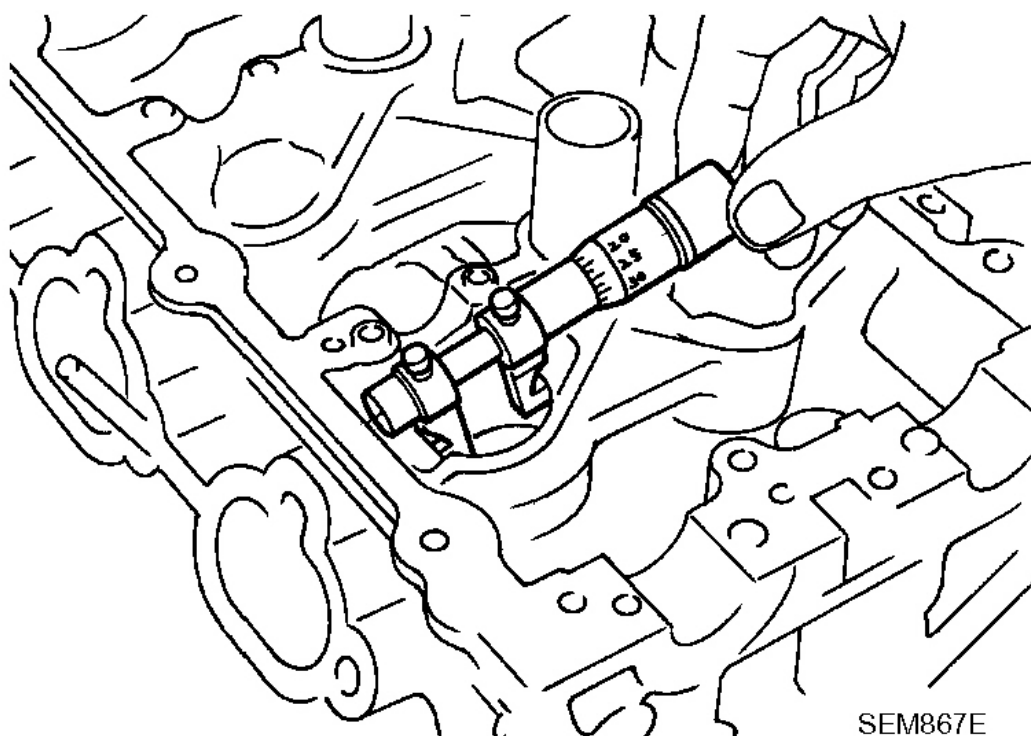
Identifying Inner Diameter Of Valve Lifter Hole Of Cylinder Head With Inside Micrometer
